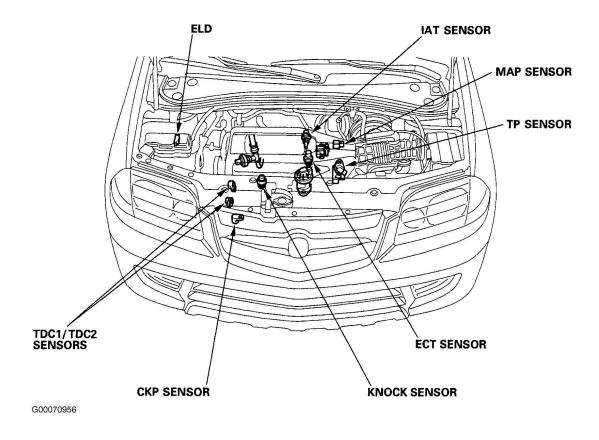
Locating Engine Performance Related Components Courtesy of AMERICAN HONDA MOTOR CO., INC.
